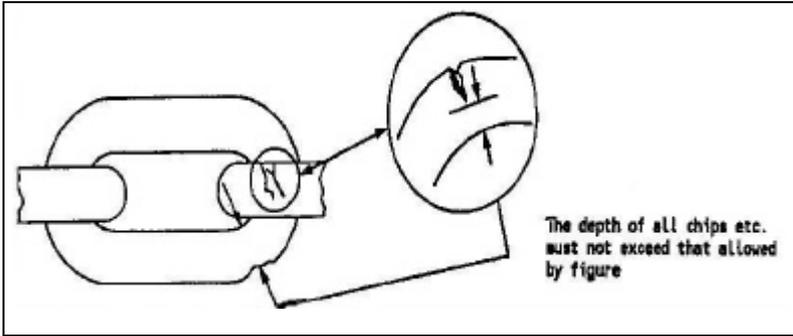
Inspecting chain links for gauges, chips and cuts
